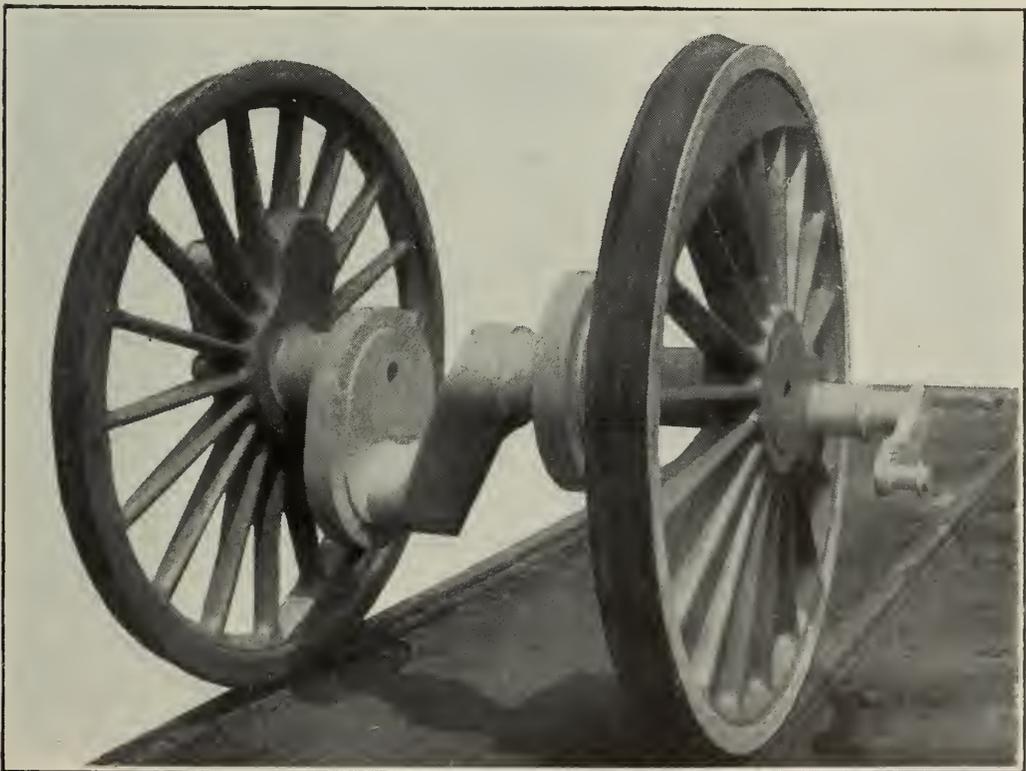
A. Z-TYPE NICKEL-STEEL CRANK AXLE, BORED OUT HOLLOW.
